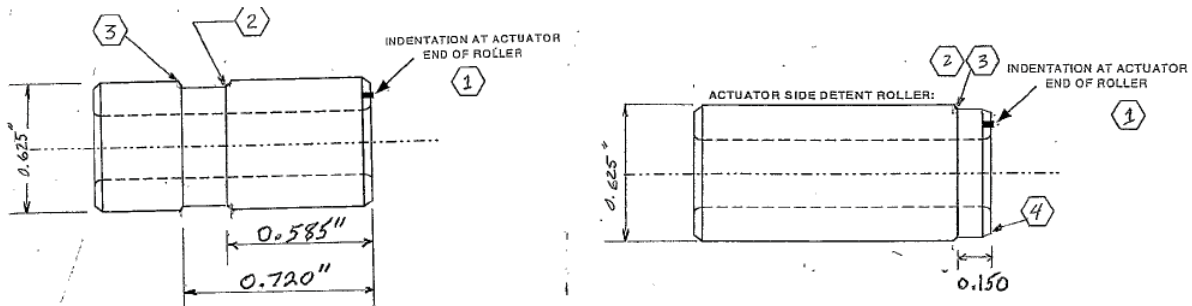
Drawings showing how these rollers are machined to avoid discrepant areas on valve visors
